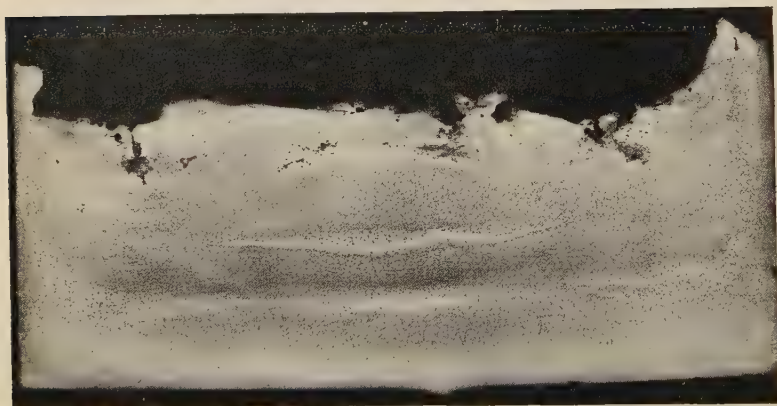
Macro-Print of Axial Face of Vibrated Unrotated Steel Casting. $\times \frac{1}{4}$.
